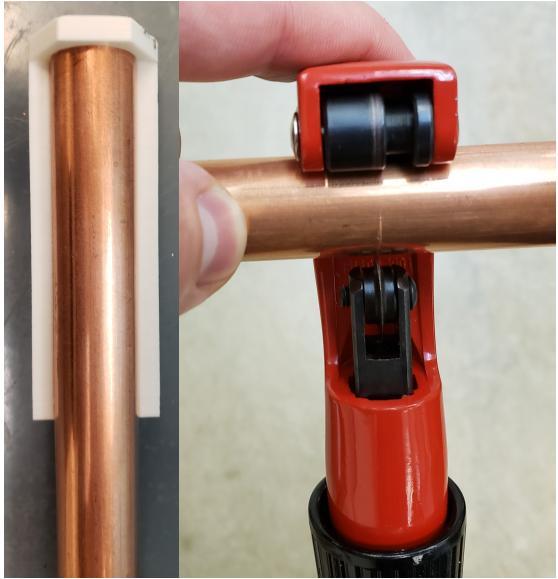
Left: measuring tube with jig. Right: cutting tube with tube cutter.
